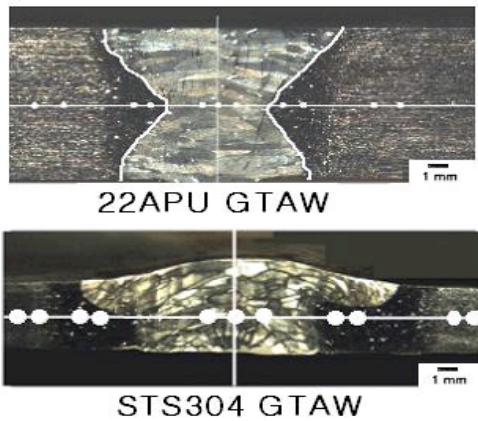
Cross section view of test specimens of 22APU and STS 304 with GTAW
